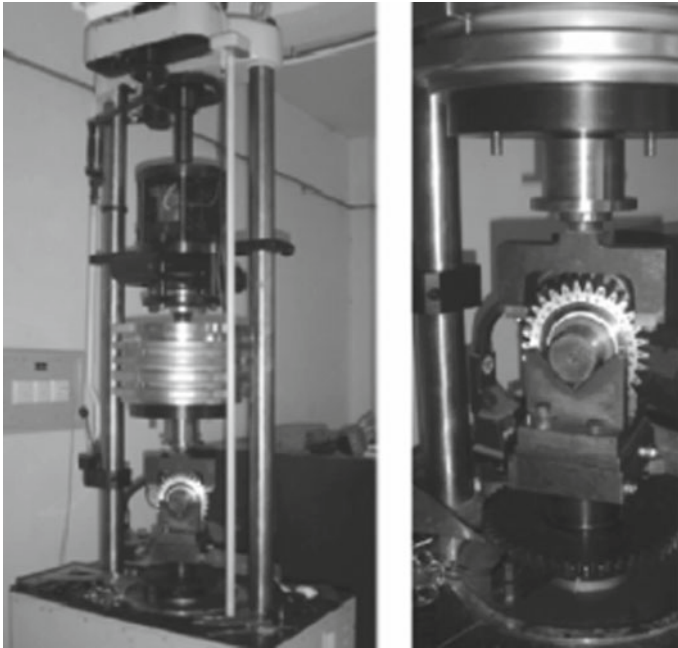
Electromagnetic resonance fatigue machine and fixture
